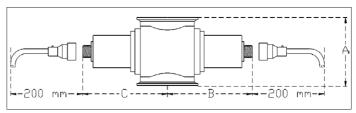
Dimensions of the sensors depending on the F-values of the sensor body
